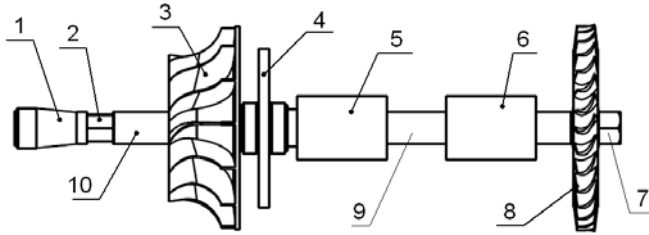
Diagram showing the components of compressor drive unit rotor set of the turbine engine, 1- clamping sleeve with the internal splines, 2- clamping nut from rotor compressor, 3- compressor rotor, 4- thrust disc of axial bearing, 5, 6- radical bearing sleeve, 7- clamping nut from rotor of compressor drive unit turbine, 8- rotor of compressor drive unit turbine, 9- compressor drive unit shaft, 10- compressor rotor sleeve, own study
